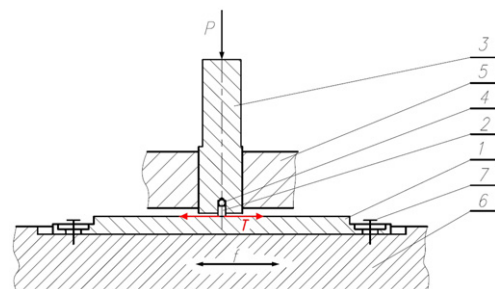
The scheme of tested assembly: 1—specimen (cylinder liner detail), 2—counter-specimen (fragment of piston ring), 3—mandrel, 4—ball-and-socket joint, 5—frame, 6—shifted slide, 7—specimen clamping, P—force pressing down specimen, f—direction of slide movement, T—friction force.
